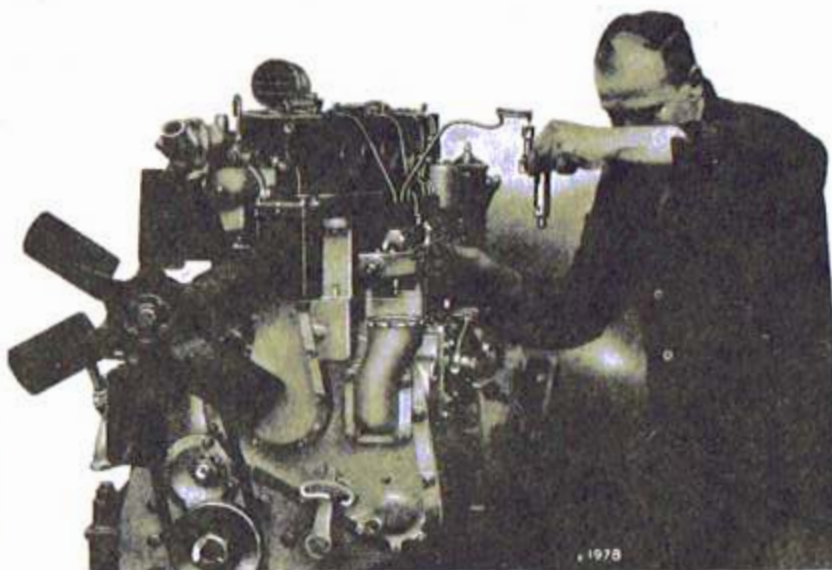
TESTING SPRAYER REMOVED FROM ENGINE
